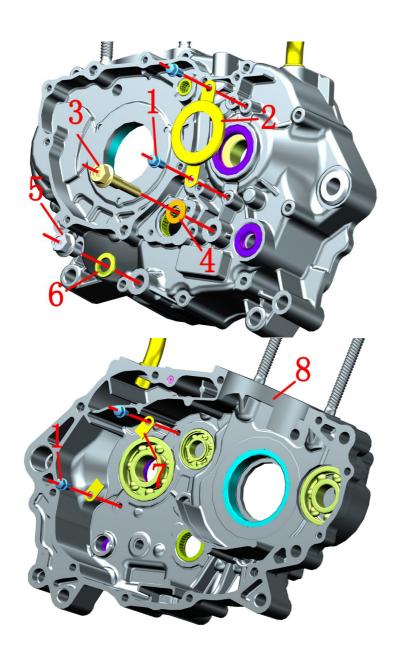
LEFT CRANKCASE		Left crankcase parts	CHK	40)
